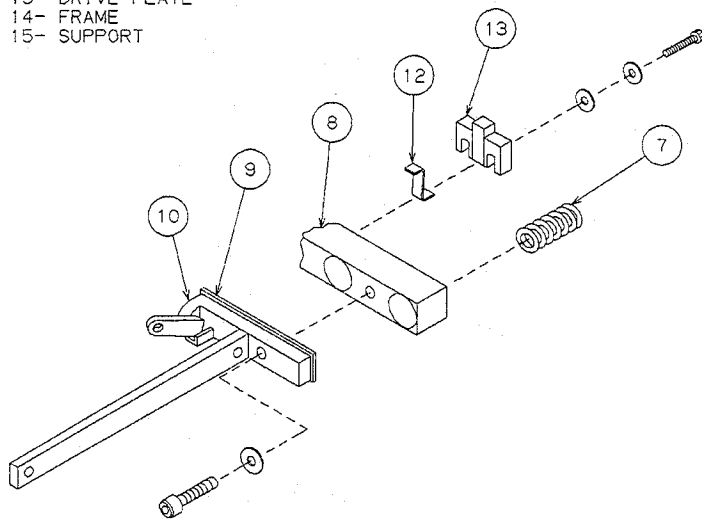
Arc Chute Molding Assembly (9330521 Contactor)
